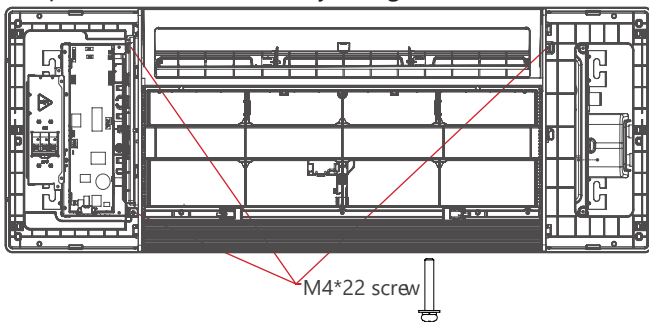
Open the Screw Cover to Access the Screws
